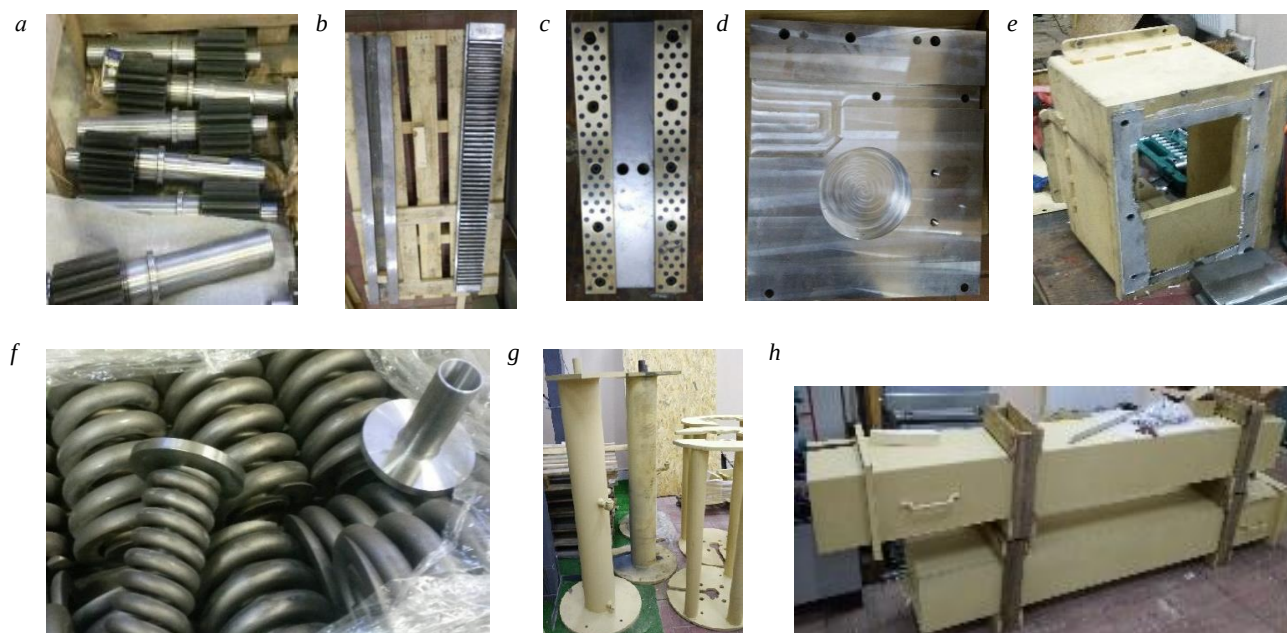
Assembly units of the linear rack-and-gear drive SRPU
